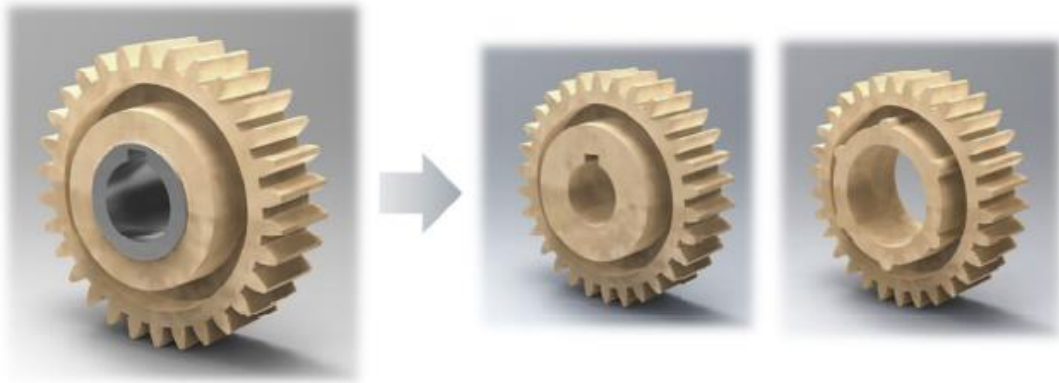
Keyway re-design to allow for removal of the steel hub [after [2]].
